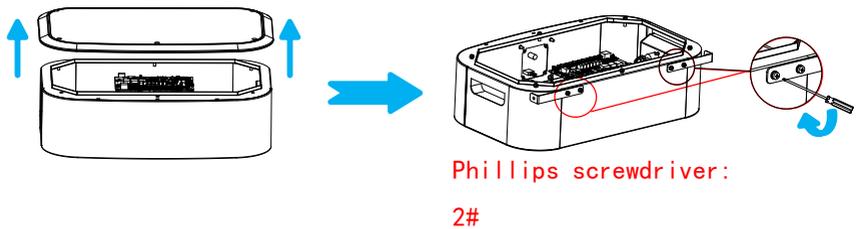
BCU cover removal and installation of wall structure 1 Schematic diagram
